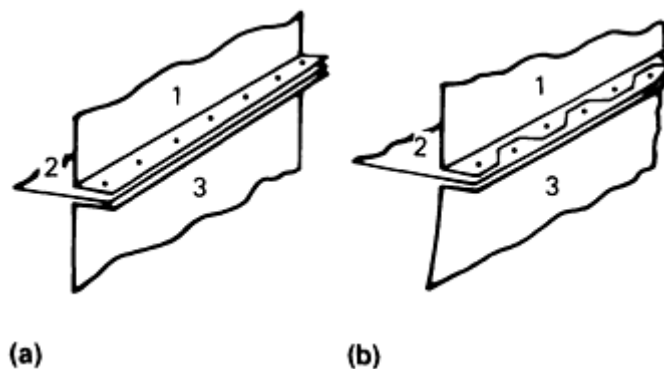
PLACEMENT OF WELDS TO JOIN THREE SHEETS OF METAL IN A T-JOINT. (A) CONFIGURATION THAT CAN BE USED TO JOIN THREE STOCK THICKNESSES. (B) RECOMMENDED CONFIGURATION INCORPORATING
